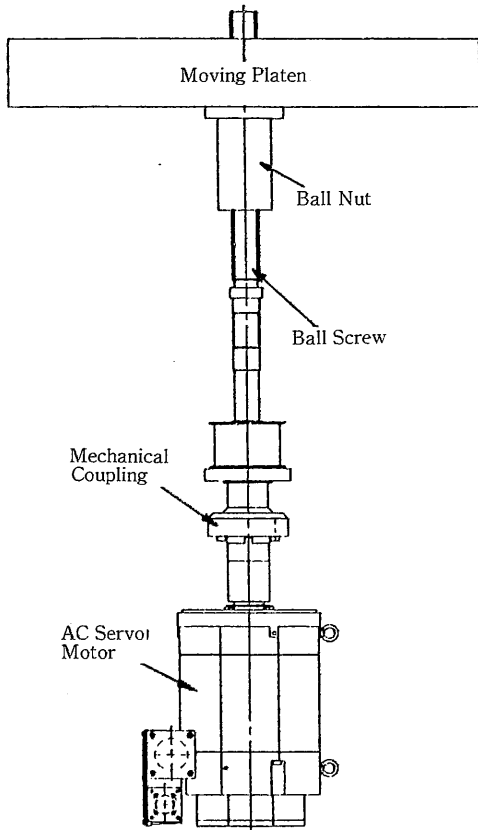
The Direct Electric Drive Mechanism (single unit)
